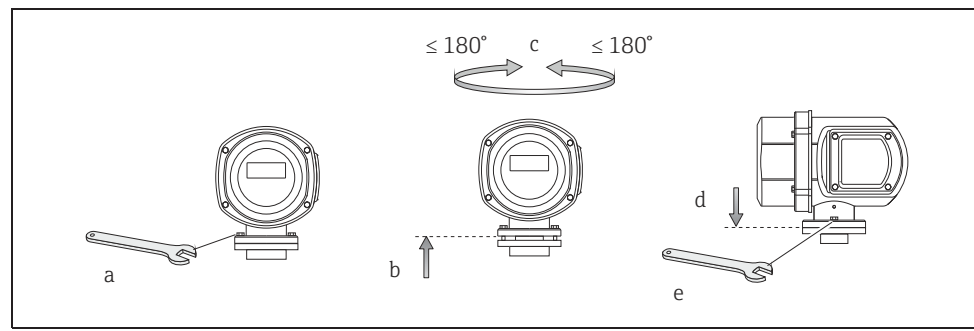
Turning the transmitter housing (stainless-steel field housing)
